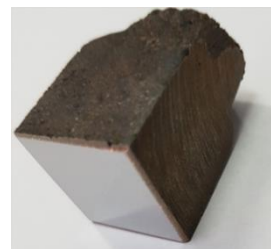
View of a test rod cutting surface that underwent metallographic examination
